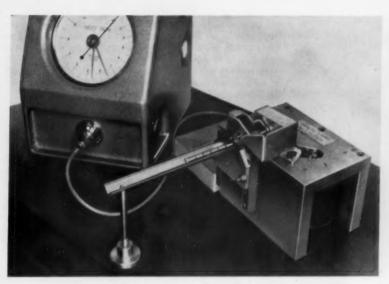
Mechanized fixture for batch-gauging rollers of fourteen different diameters
